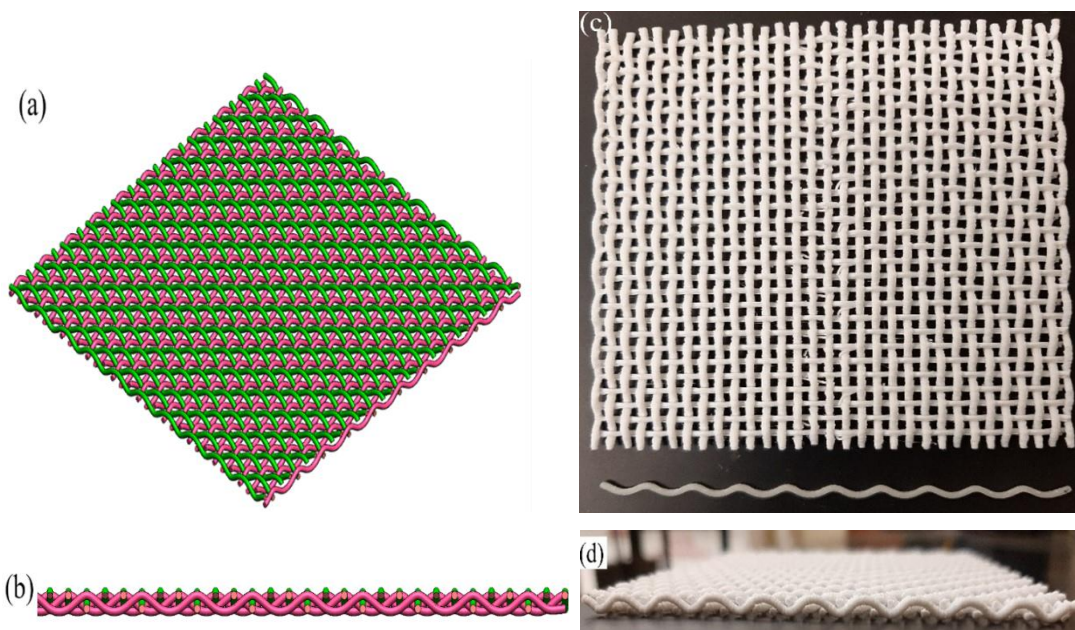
CAD model and 3D printed 2/1 twill weave fabric. (a) and (b) CAD design, (c) and (d) 3D printed fabric and a separated yarn.
